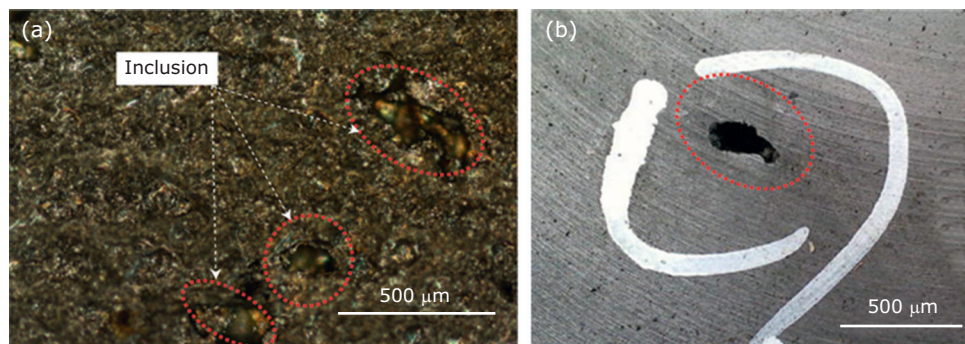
Inclusion defect due to imperfect manufacturing process: (a) slag inclusion from SLM 316ST printed parts; (b) sand inclusion in casting due to sand crush or drop of mechanical force on the sand moulds or sand cores. Reprinted with permission from (92)
